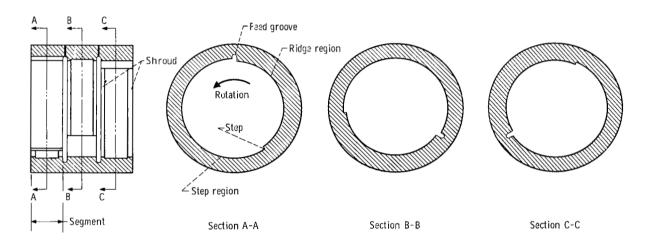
Three-segment, one-pad shrouded Rayleigh step journal bearing.
